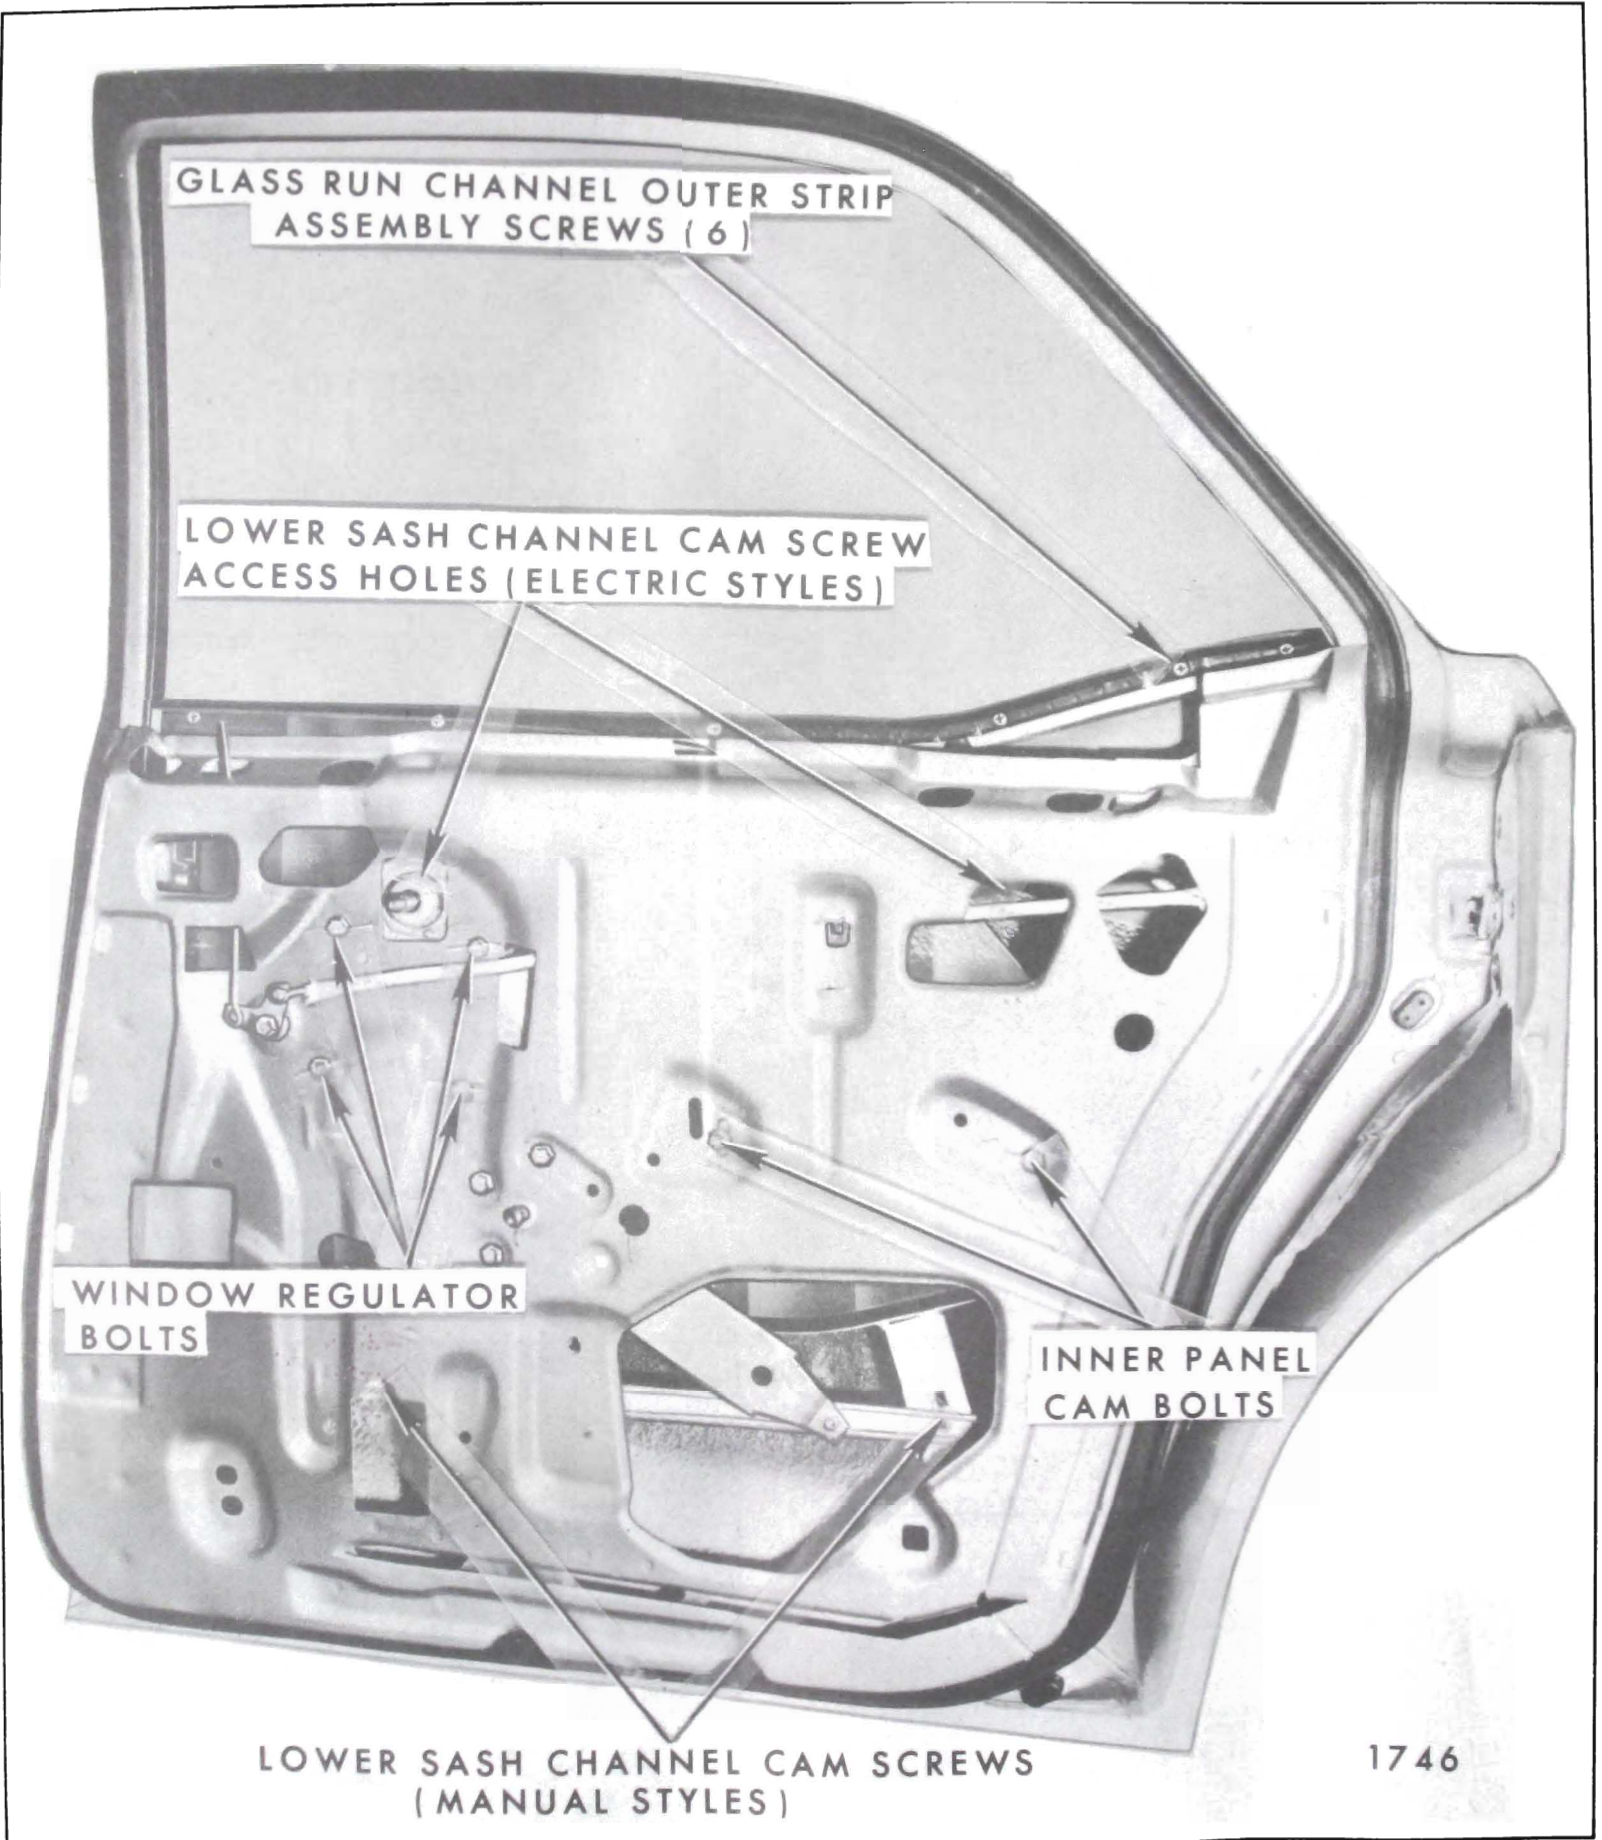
Window Regulator Removal - "B" Closed Styles
